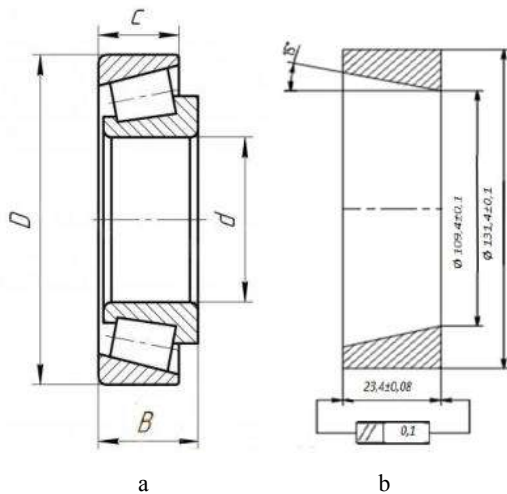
The design scheme: a – bearing 32017X; b – layout of the ring
